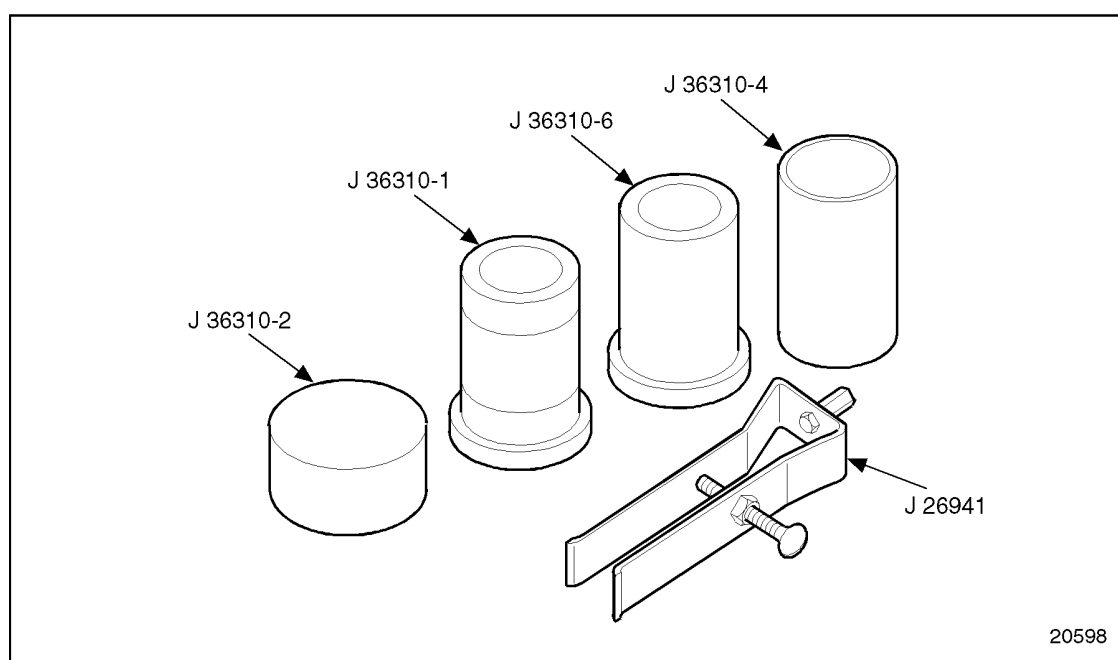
Air Compressor and Fan Drive Service Kit Set
